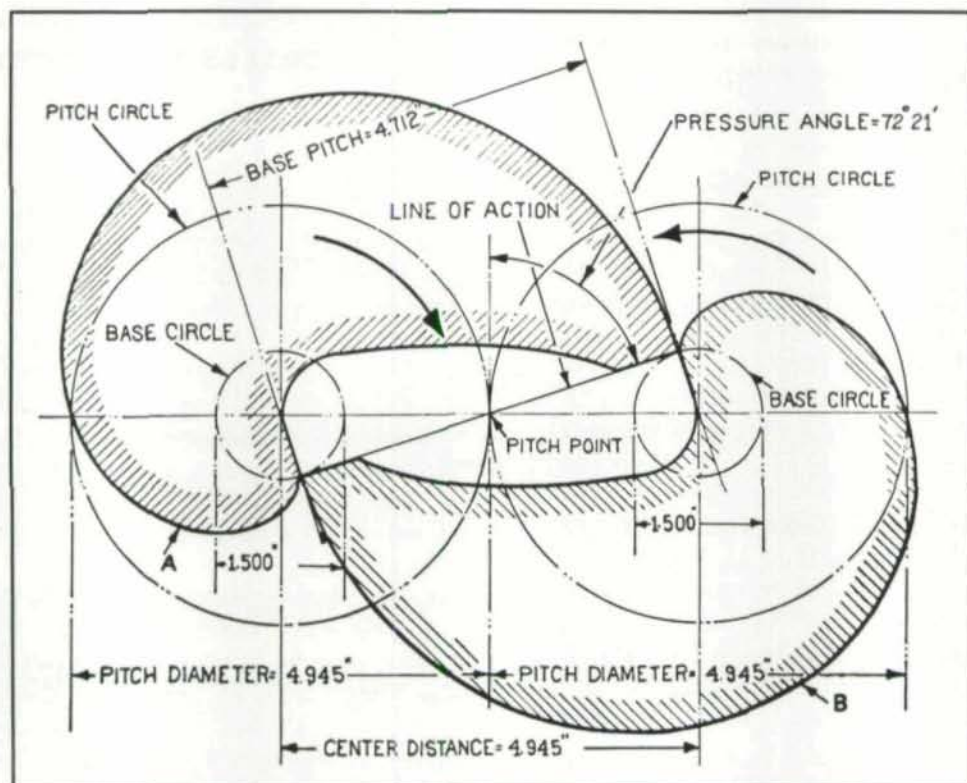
Involute applied to two one-tooth gears, indicating that the involute has its origin at the base circle, but is not limited in length.
